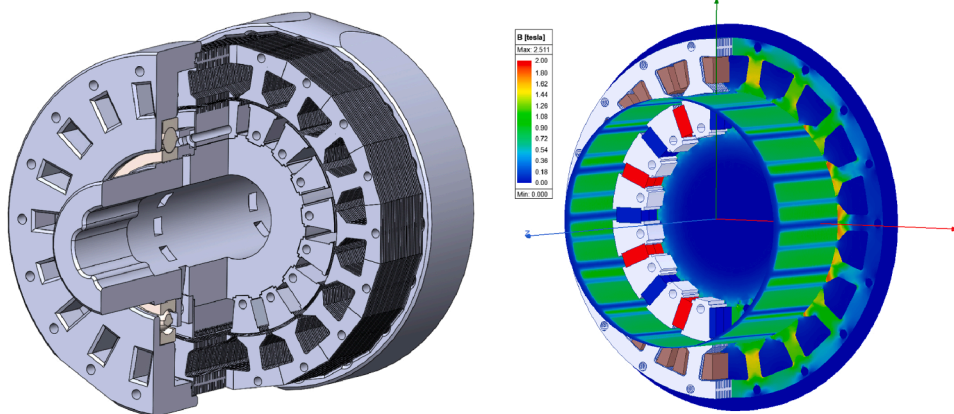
3D model of prototype machine (left); Magnetic induction in the cross-section and airgap (right).
